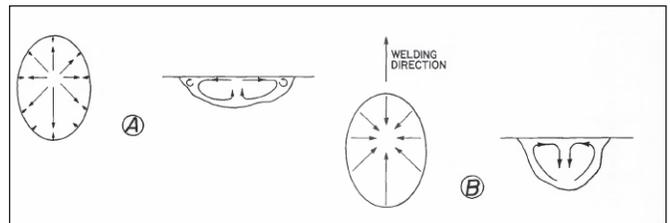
Apparent fluid flow pattern on weld pool surface and proposed subsurface flow pattern: A — High-aluminum welds; B — high-sulfur welds.
